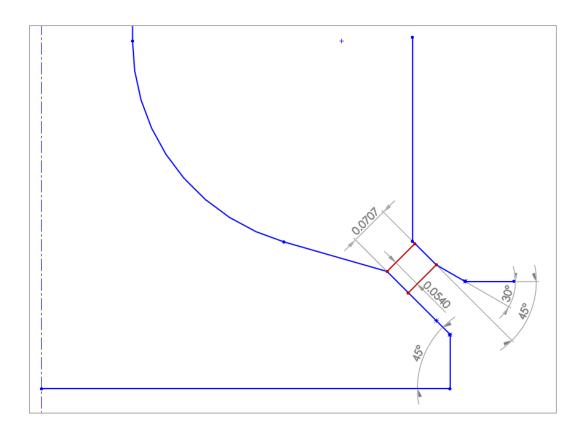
Drawing of the 45° valve and seat opened at 0.1 inches
